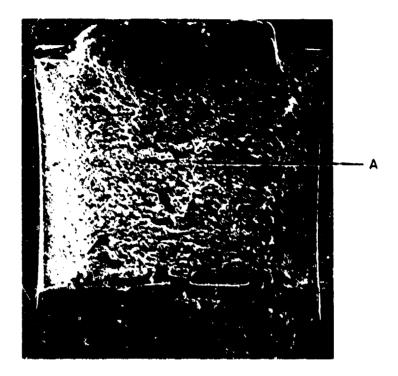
Fracture surface of an HY-130 Charpy specimen tested at  $-18^{\circ}\text{C}$ , 8x.
